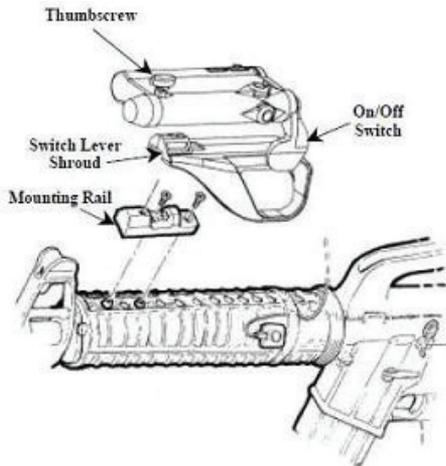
M16A2/M4 mounting bracket
